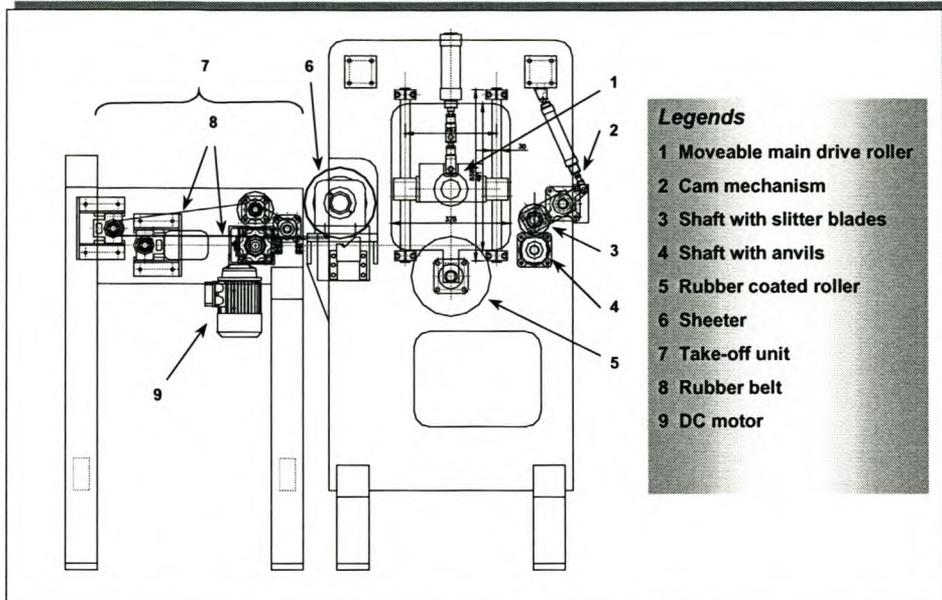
Side-view drawing depicting the assembly of the sheeting and slitting section (drawing courtesy of C. Butcher, B+ Projects).
